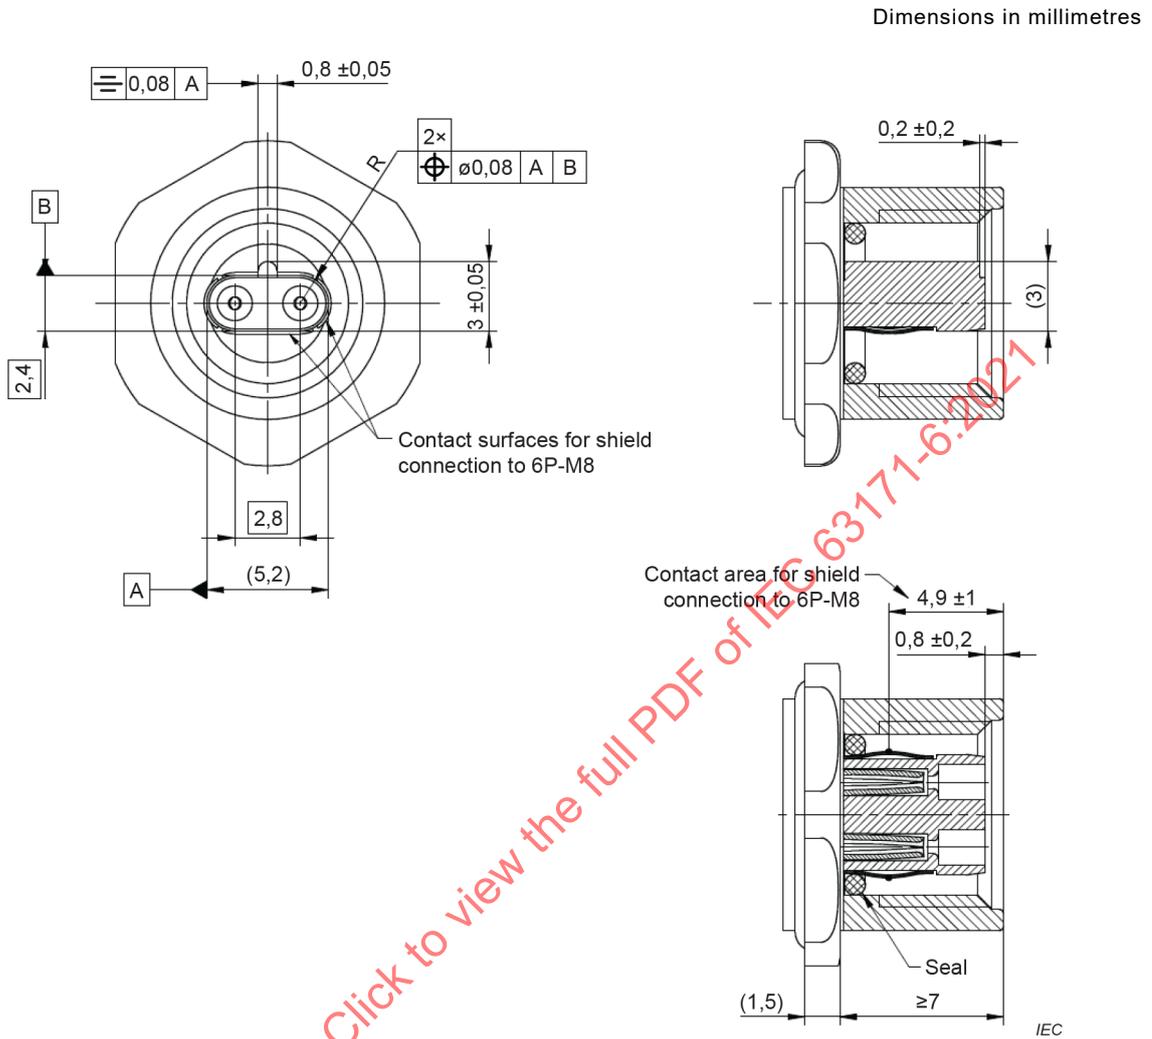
Style 6J-M8, M8 thread jack, mating dimensions
